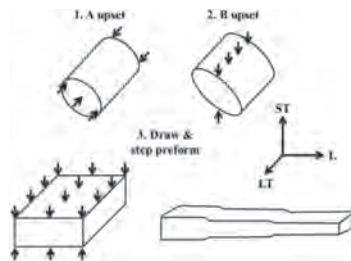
H-beam forging steps prior to closed-die forging into final shape.
